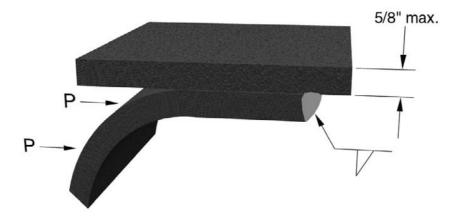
Typical Type 6 weld joint for shell-to-head.
